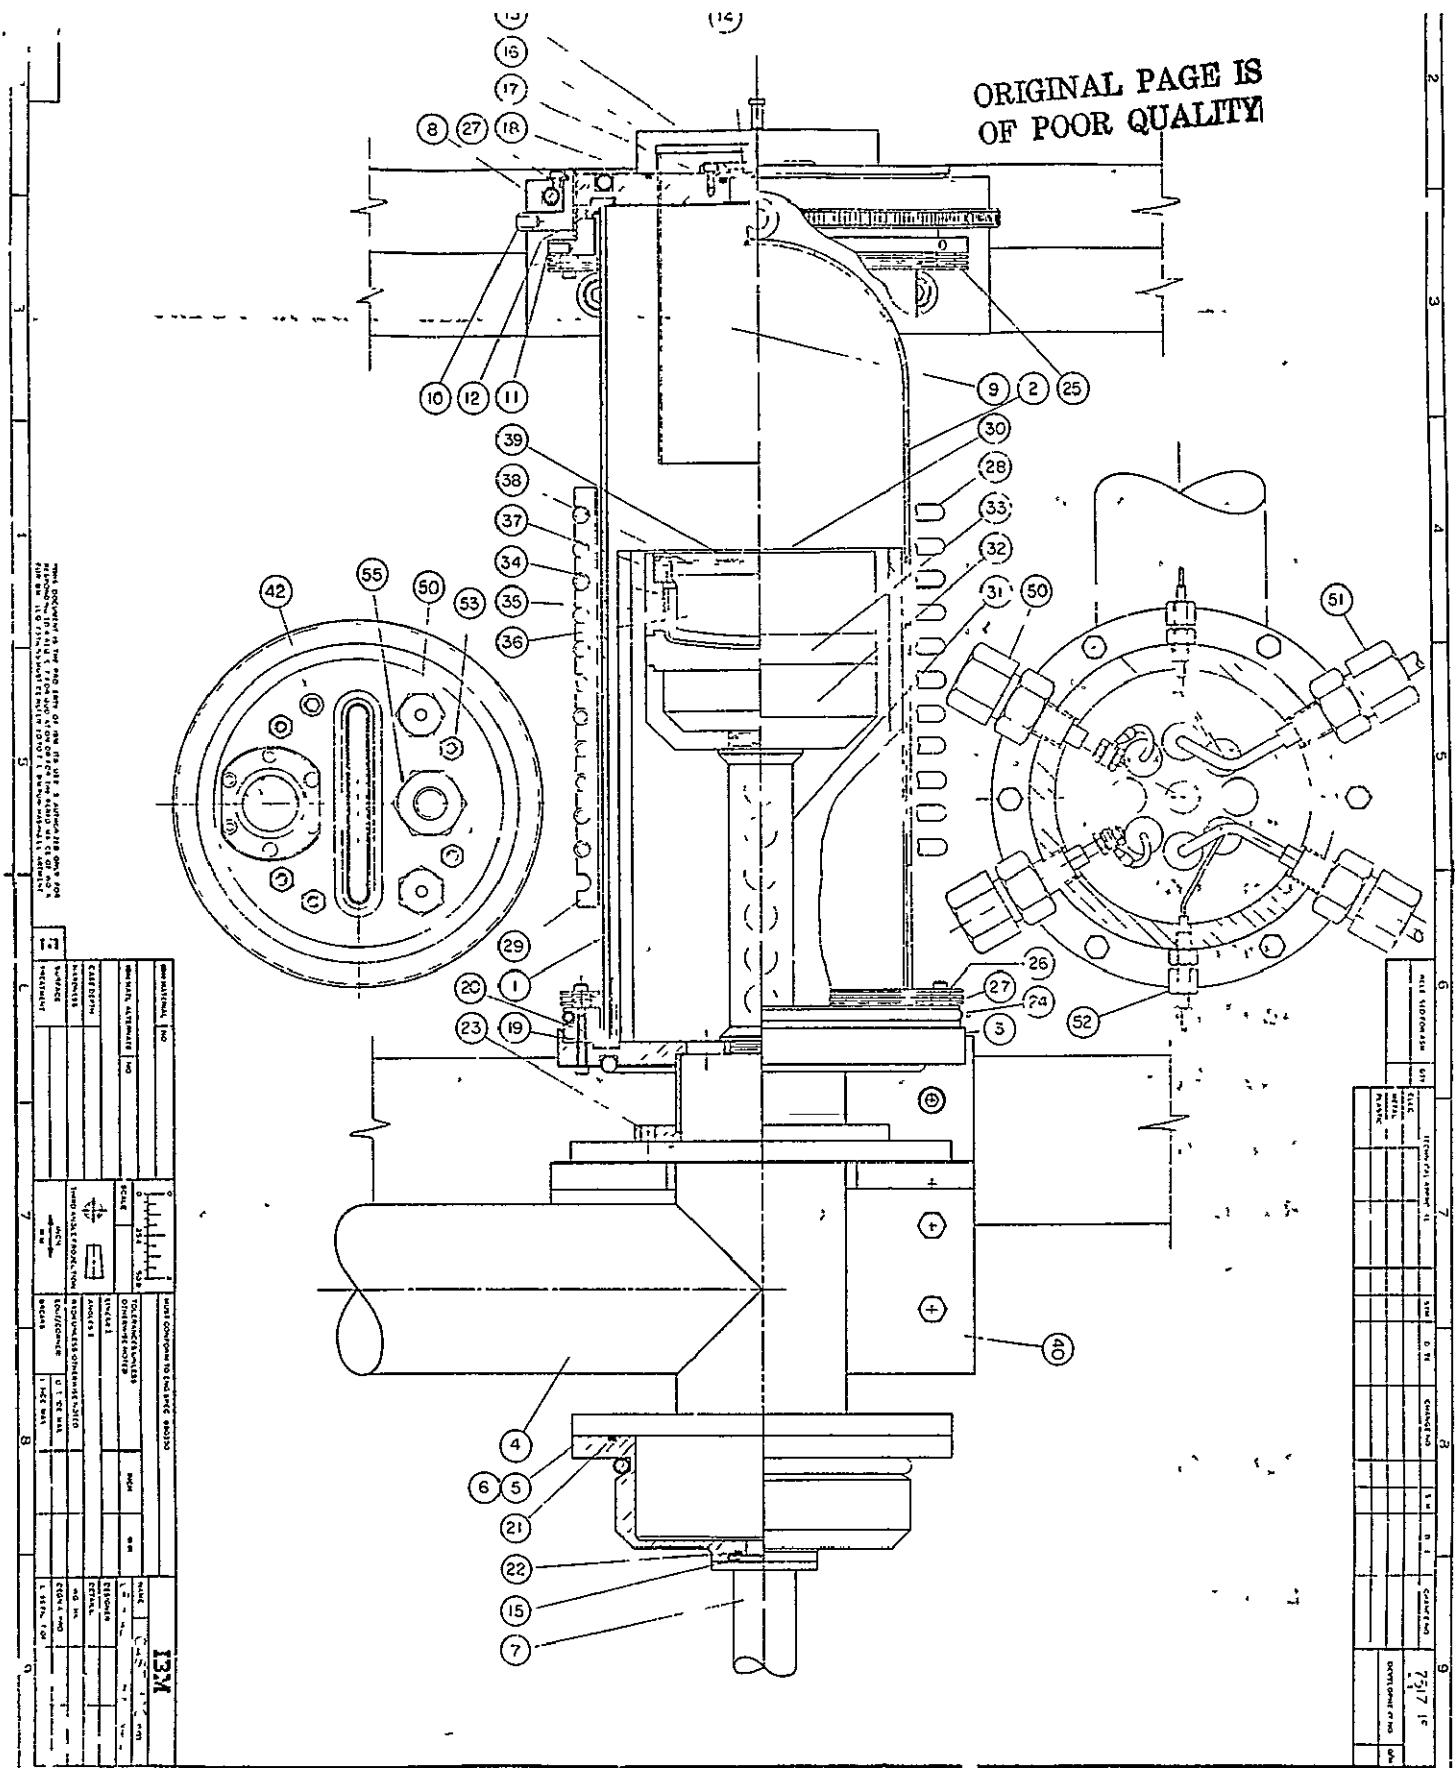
Assembly drawing of 100-mm CAST ribbon growth system.
